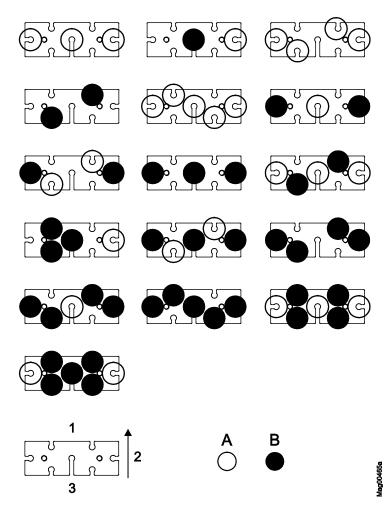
Equipment plan balancing springs – Access XL2 and Access XXL
